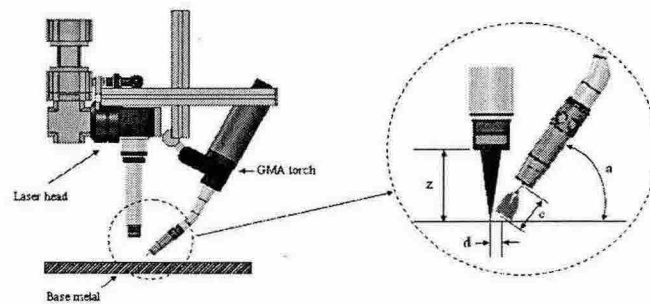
Experimental setup and parameter definitions for CO₂ laser-GMA hybrid welding
